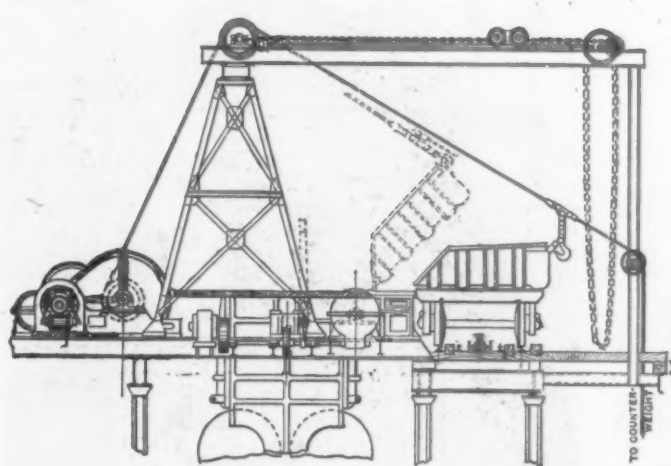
Elevations Showing Arrangement of Skip Unloading Apparatus at Giant Rolls.
